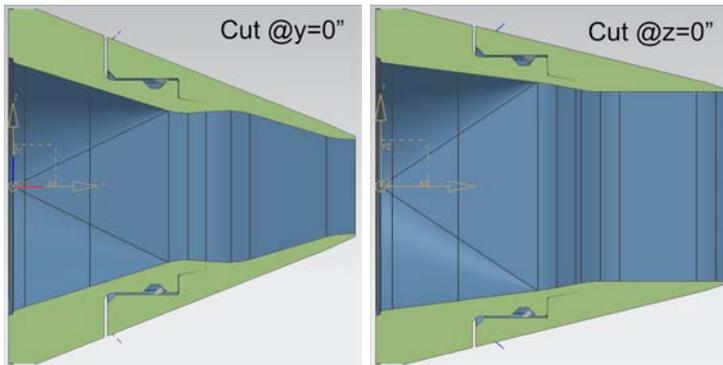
ASSEMBLY CROSS-SECTION INCLUDING DR2A2, NA2Z
